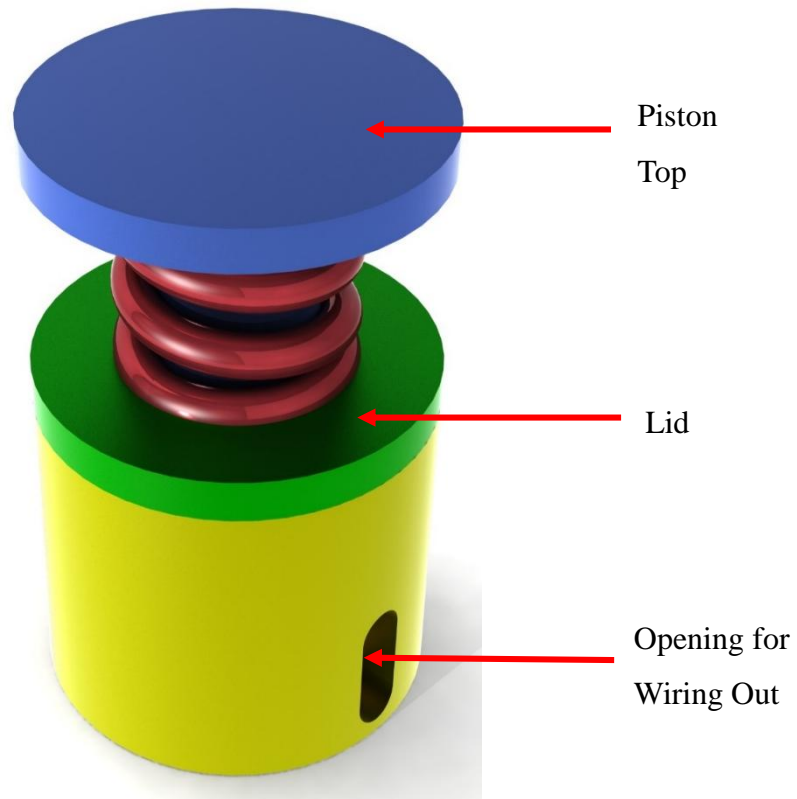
Isometric view conceptual design of structural design 2 and component assembly
